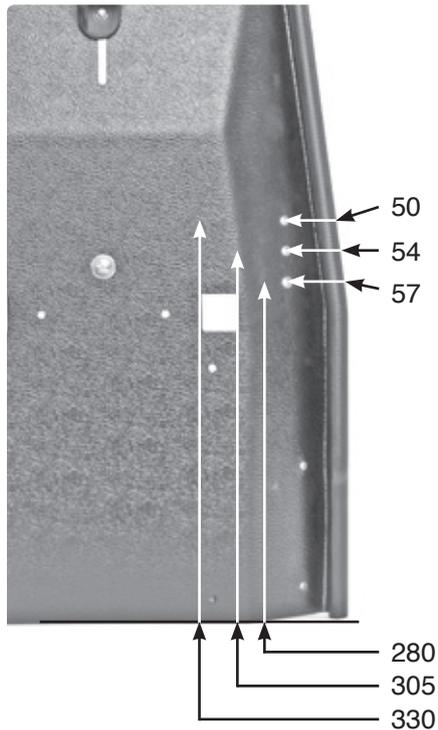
If there are no pre-drilled holes, drill them according to the given dimensions. Dimensions are given in millimetres and are measured from each edge.
